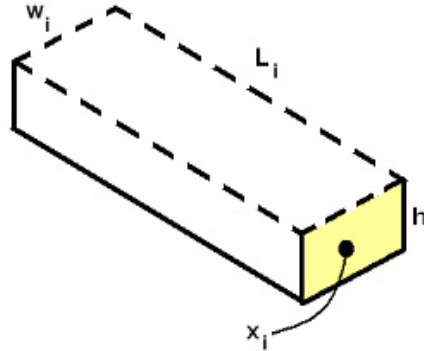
Example truss structure element to be machined using AWJ cutting (dashed line denotes cutting path).
